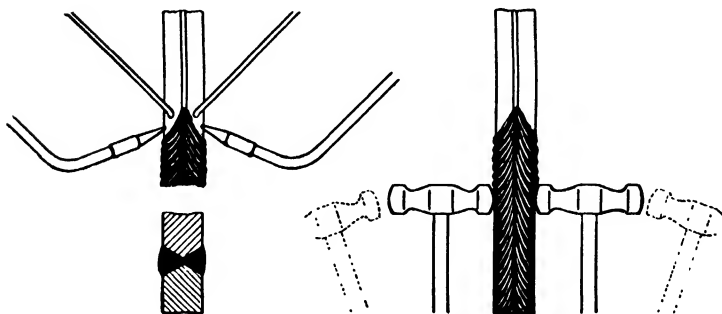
Simultaneous double-sided welding of an X-joint.
